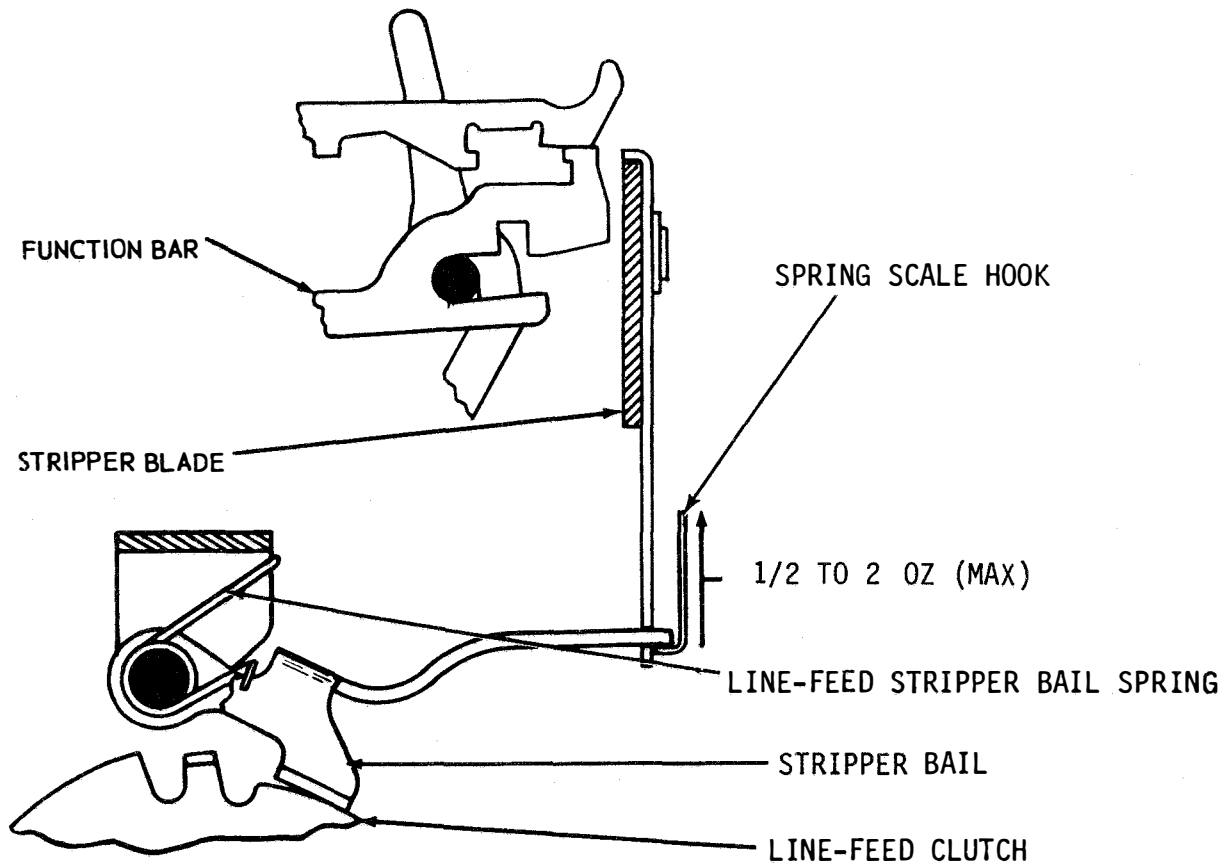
Line-Feed Stripper Bail Spring, Right Side View
